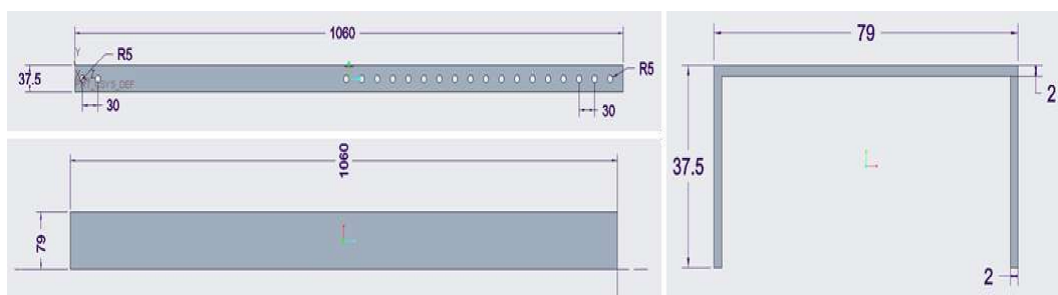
Back Support of Solar PV Mounting Structure (dimensions in mm)
